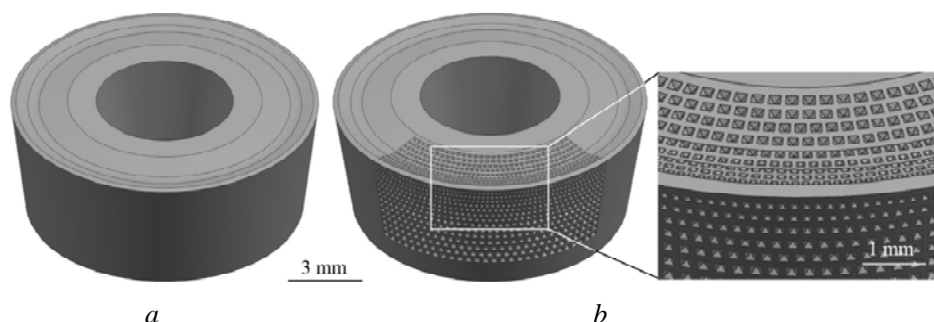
Cutting tools used in this study: conventional (*a*), surface-modified with rake and flank patterns at higher magnification (*b*).
